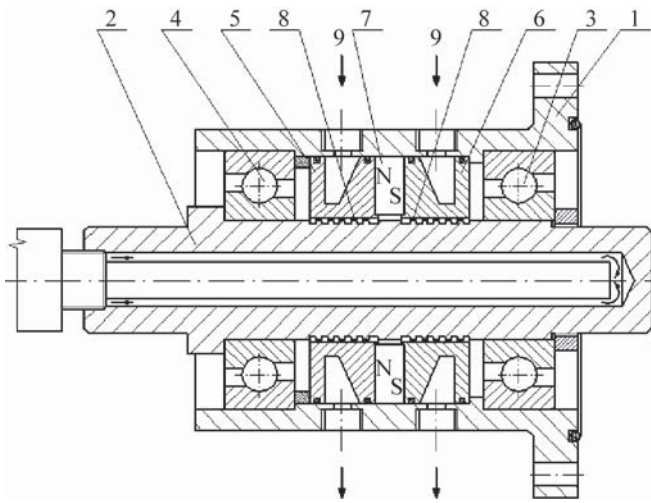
Magnetic fluid seal for high-revolution shaft with external and internal cooling system: 1 – casing; 2 – hollow shaft; 3, 4 – rolling bearing; 5, 6 – pole shoes; 7 – permanent magnet; 8 – magnetic fluid; 9 – channel
